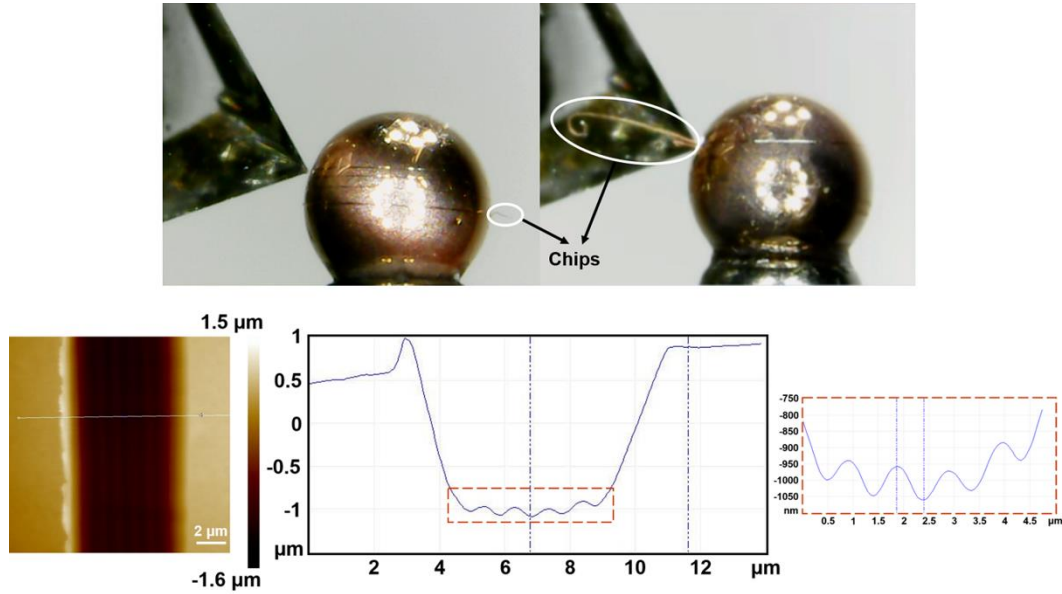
Optical image of machining process on the copper coated micro-ball surface and AFM image of machined ripple.
